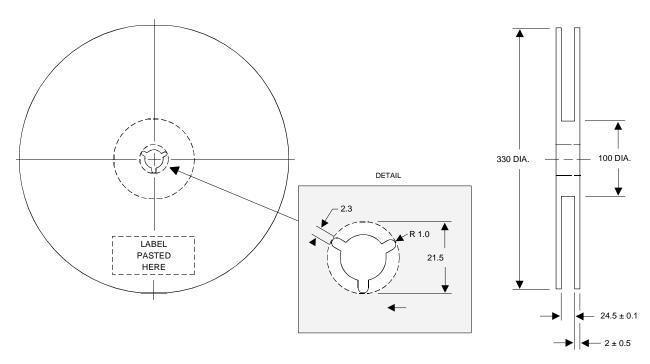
ZHX1010 Reel Dimensions (Unit: mm)
